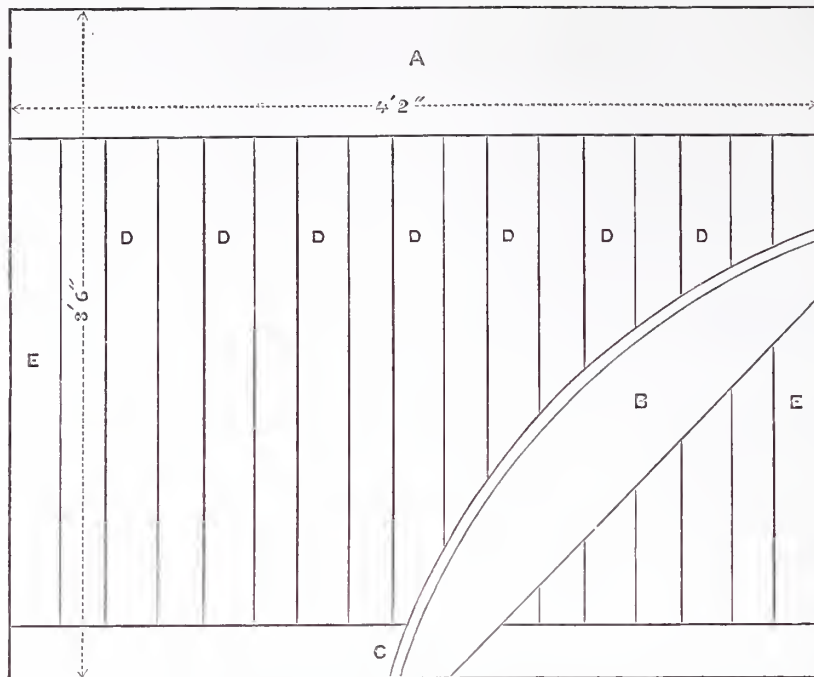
Front view of Back—A, Wrest Plank. B, Bent Side. C, Bottom. D, Bracings. E, E, Linings. (Scale, 1 inch to 1 foot.)
